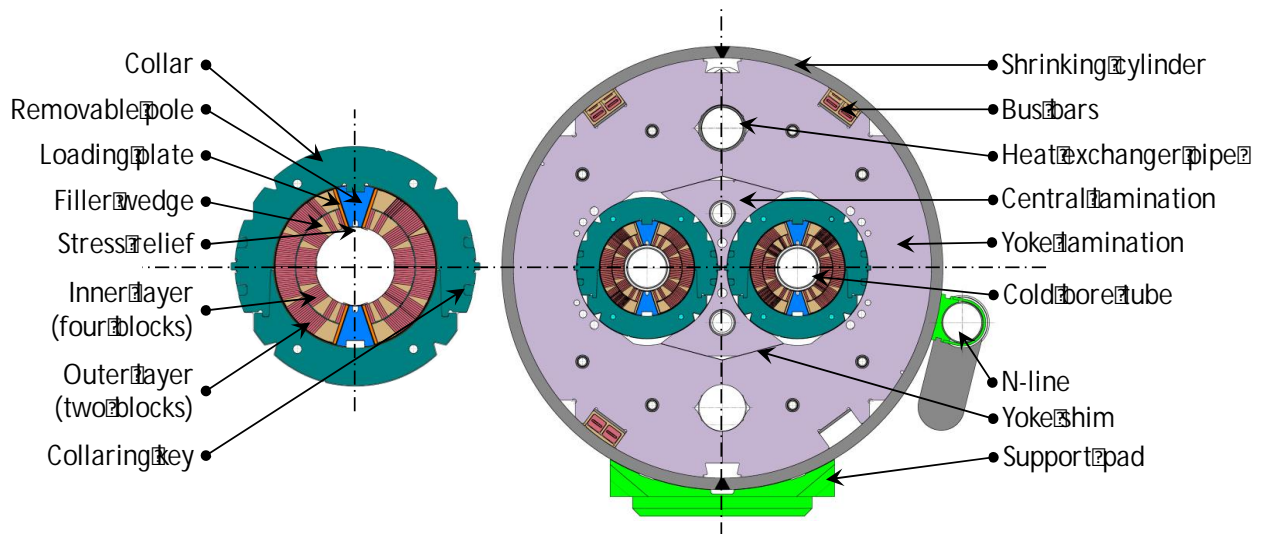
Cross-section through (left) the 11 T dipole collared coil; (right) the cold mass assembly.
